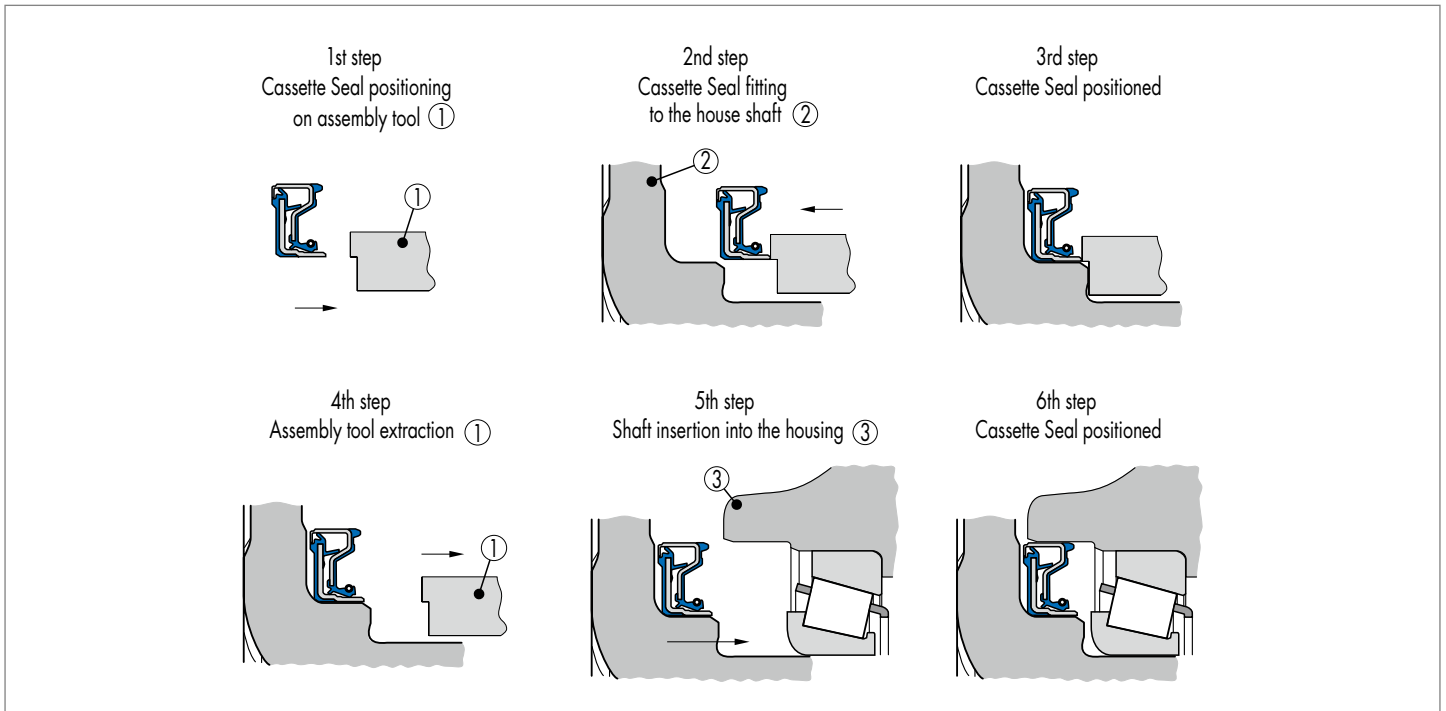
Installation of Simmerring Cassette Seal – Case D ("First on the shaft") / Montage d'une bague Simmerring Cassette Seal – Cas D ("d'abord sur l'arbre") / Montaje de Simmerring Cassette Seal – caso D ("Primero sobre el eje") / Montagem de anel retentor Cassette Seal – Tipo D ("Primeiro eixo")
